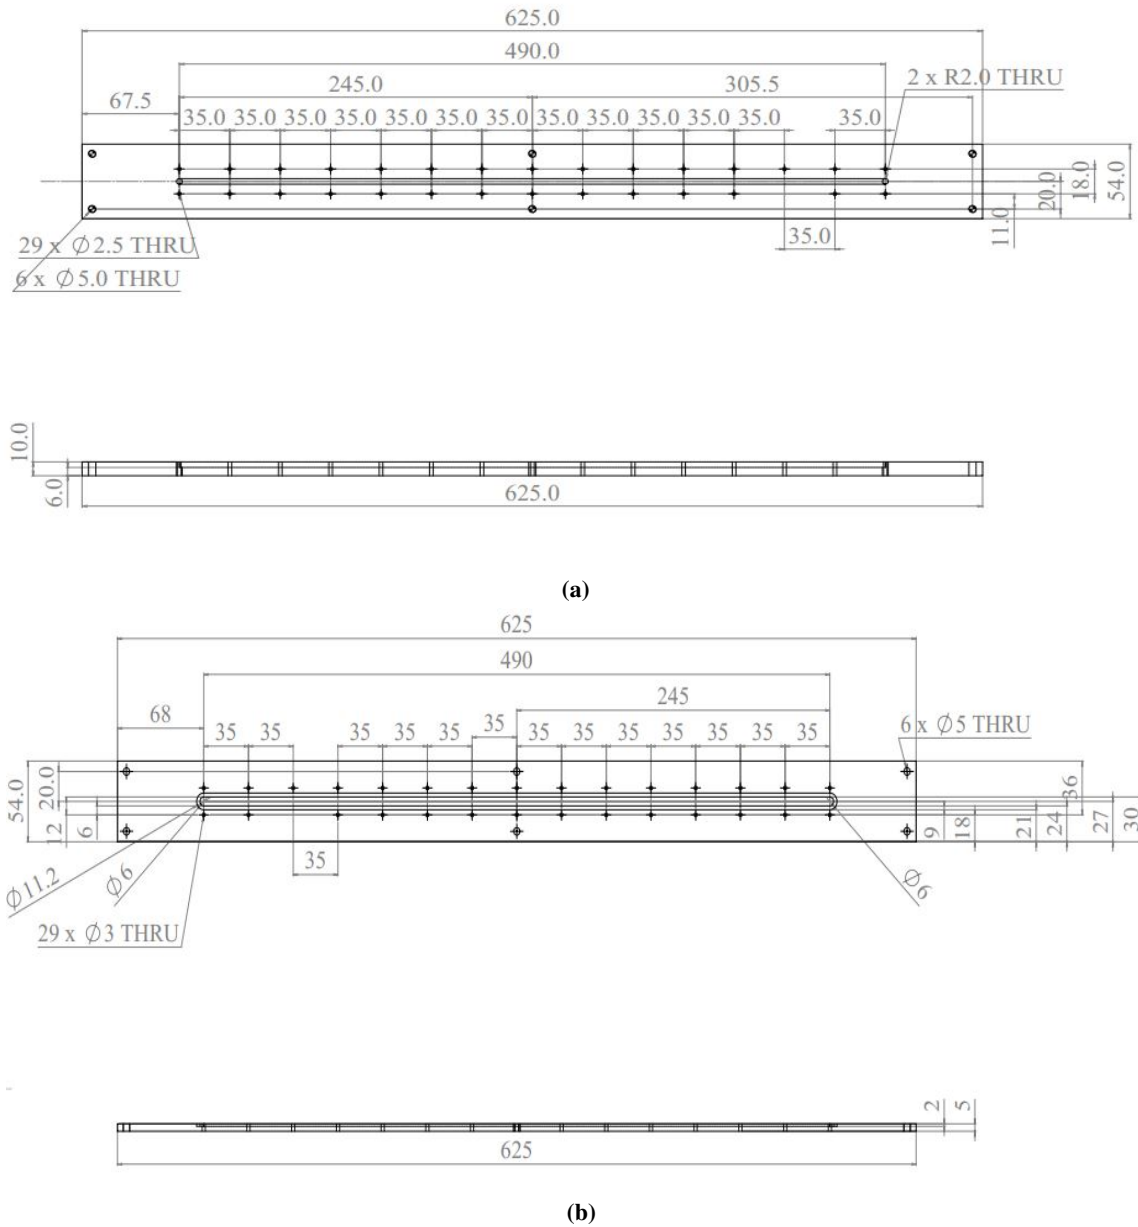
The plastic channel was built using two caskets with an O ring to prevent it from any leaks. The dimensions are in millimeter. Fig (a) shows the channel which has a cross-section of $4 \times 4 \text{ mm}^2$ dimension. Fig (b) is used to mount on Fig (a) to obstruct the flow using an ellipsoidal O ring
